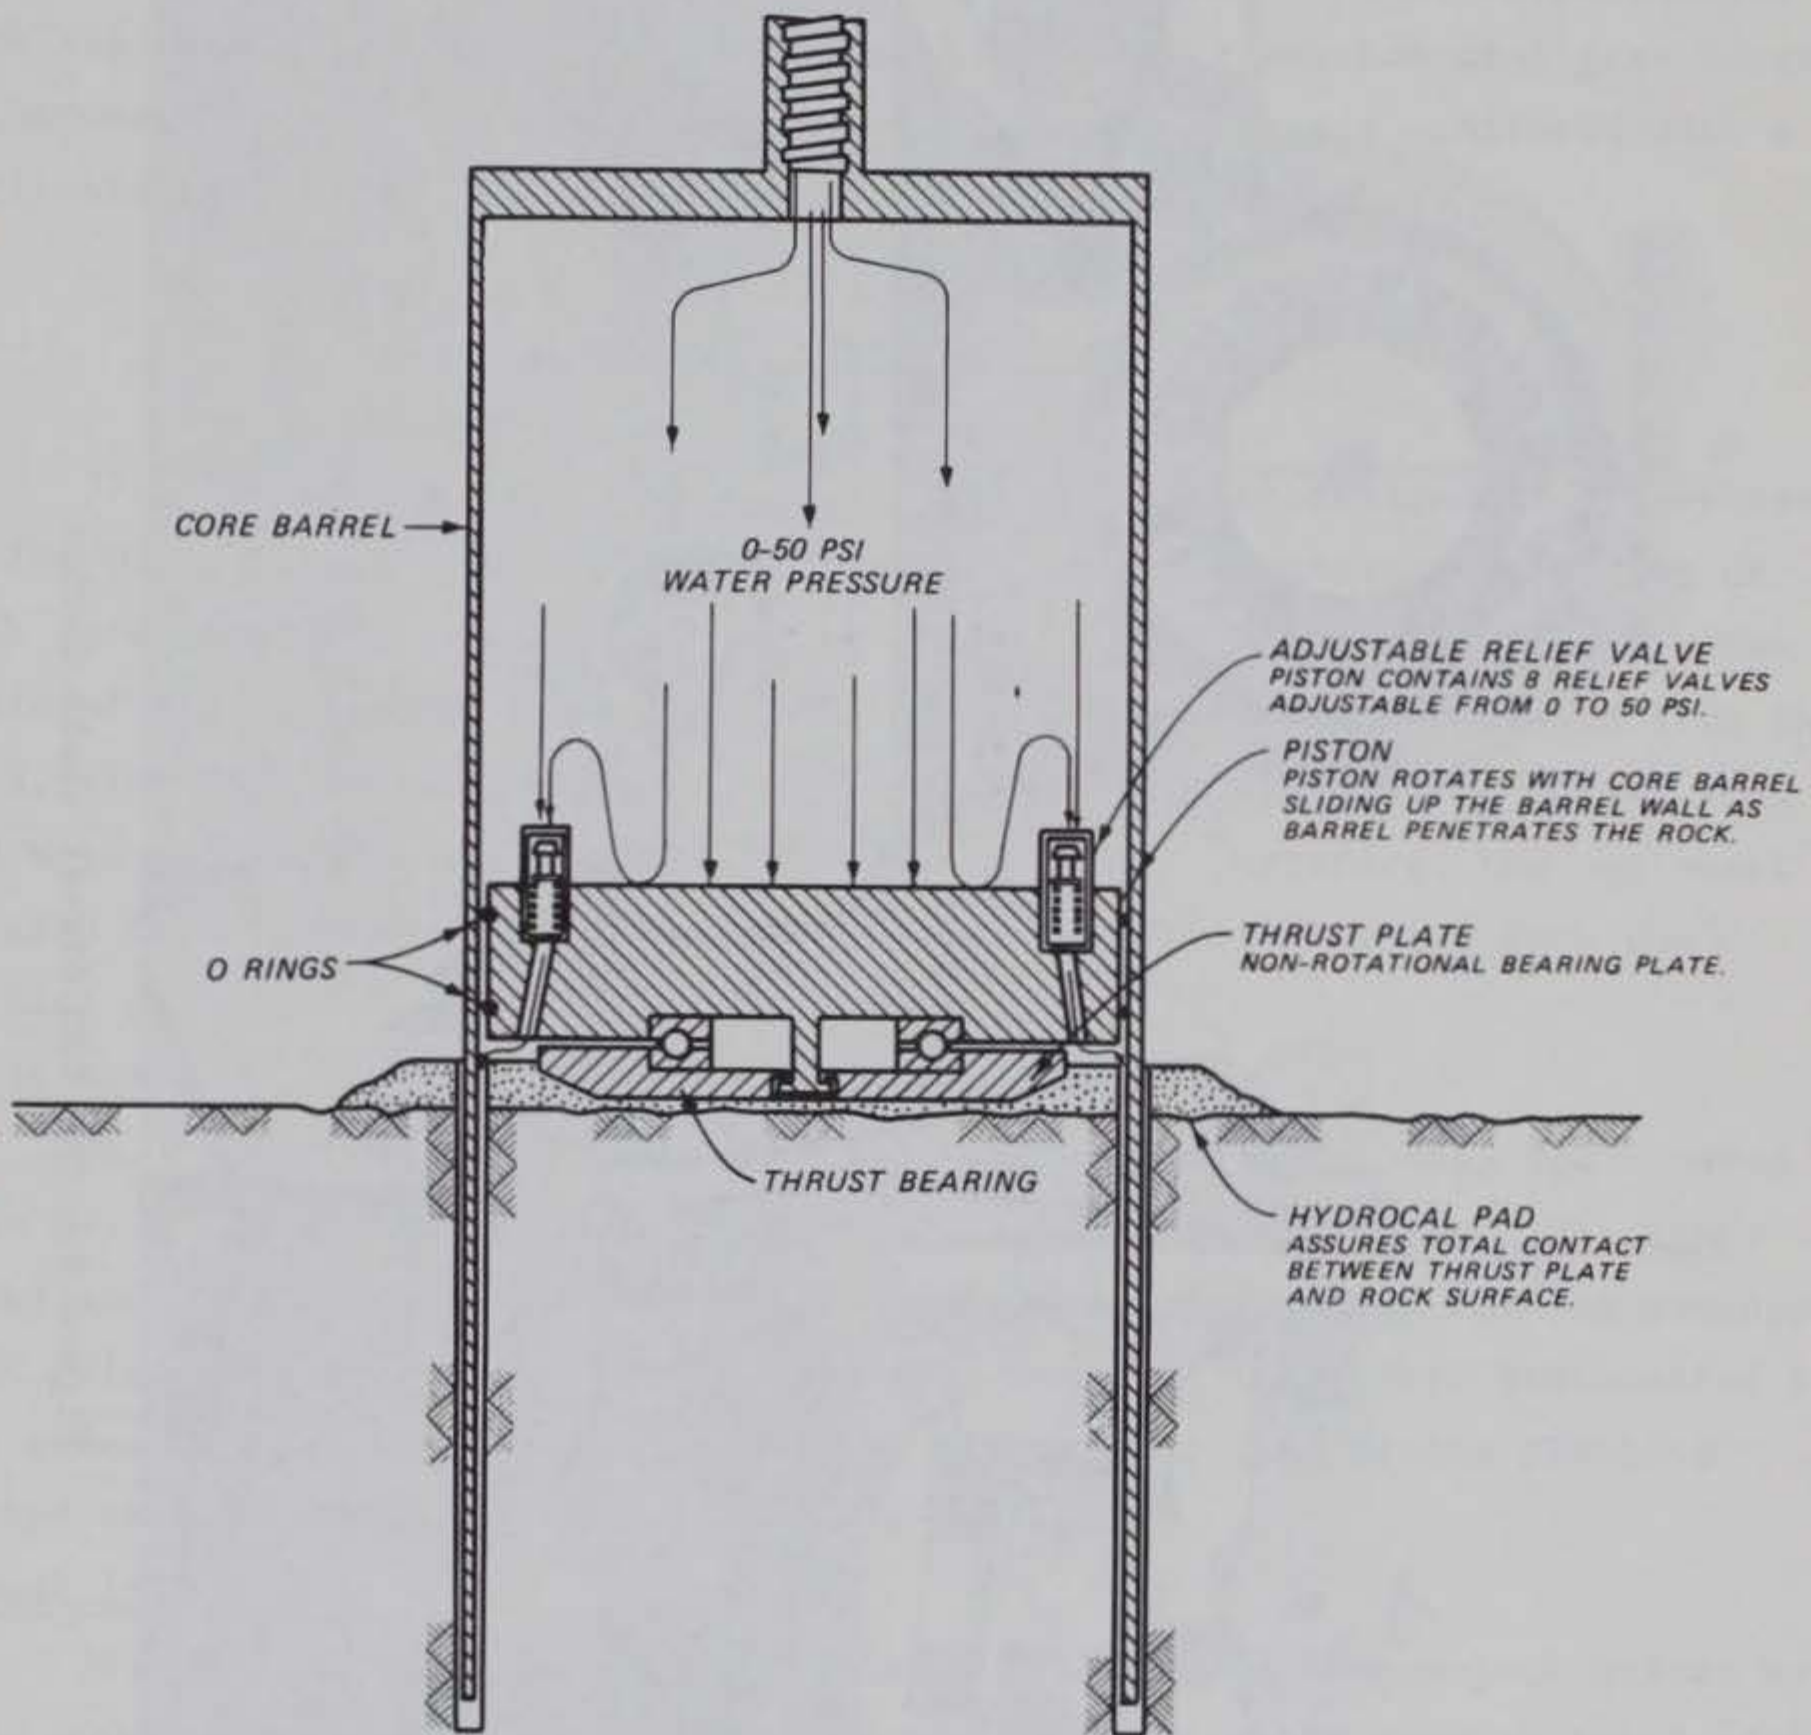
Core barrel assembly used to prepare in situ torsional shear specimens
